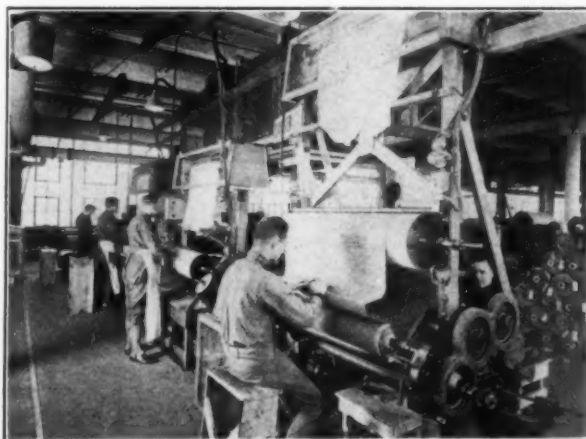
ELECTRICAL RUBBER FABRIC TESTING MACHINES.
